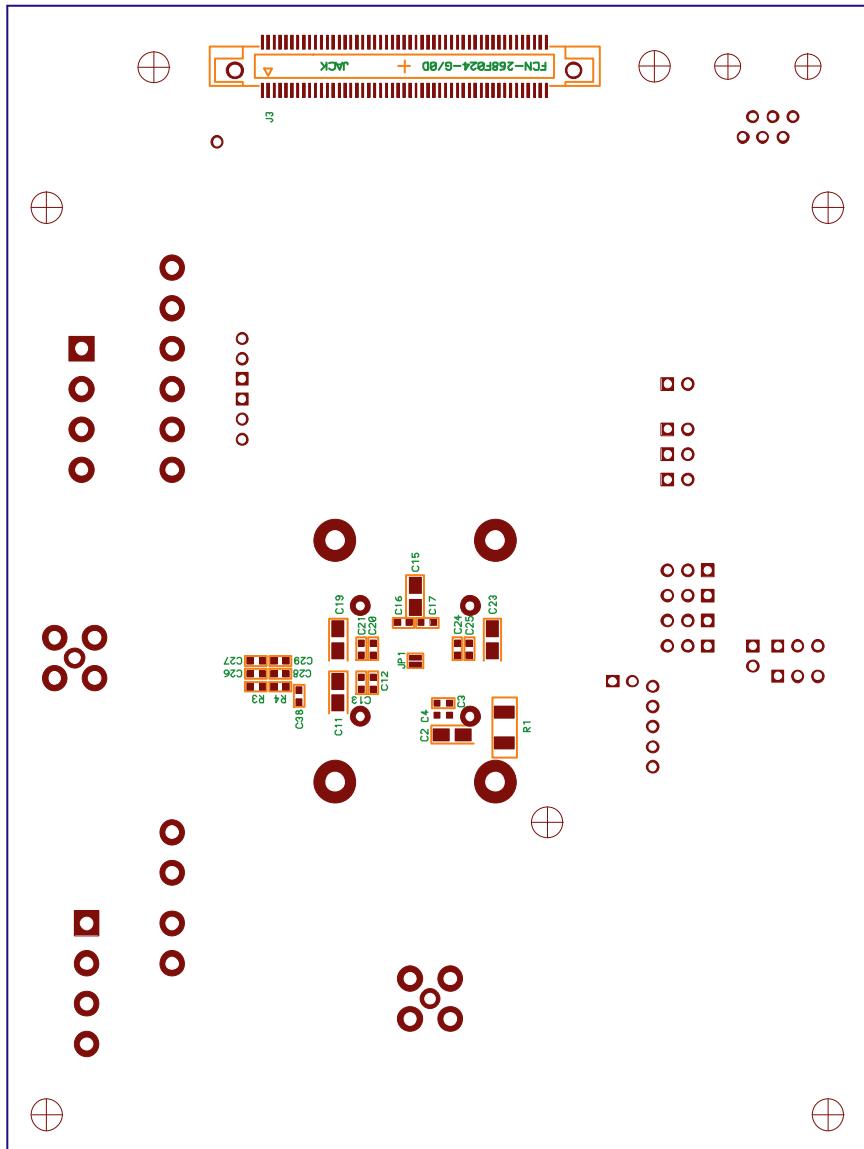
PCB Layout Bottom Placement, AD973x Evaluation Board, Rev. F
